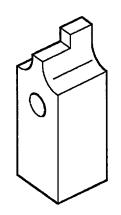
Setting Up to Machine I.D. of Bushing or Lug at Location 6, Y488.000 (Sheet 1)
